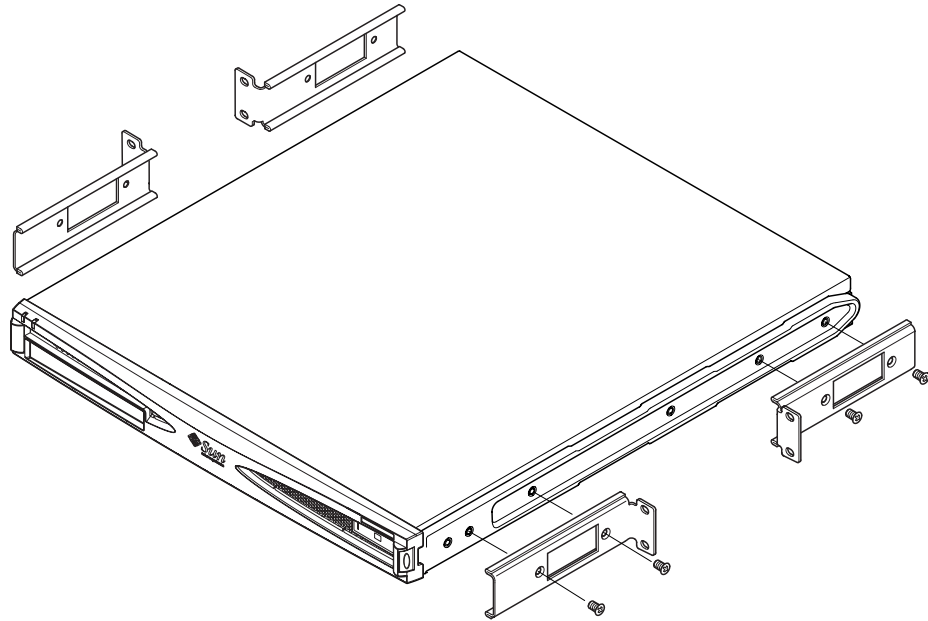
Fitting the Fixed Mounting Brackets
